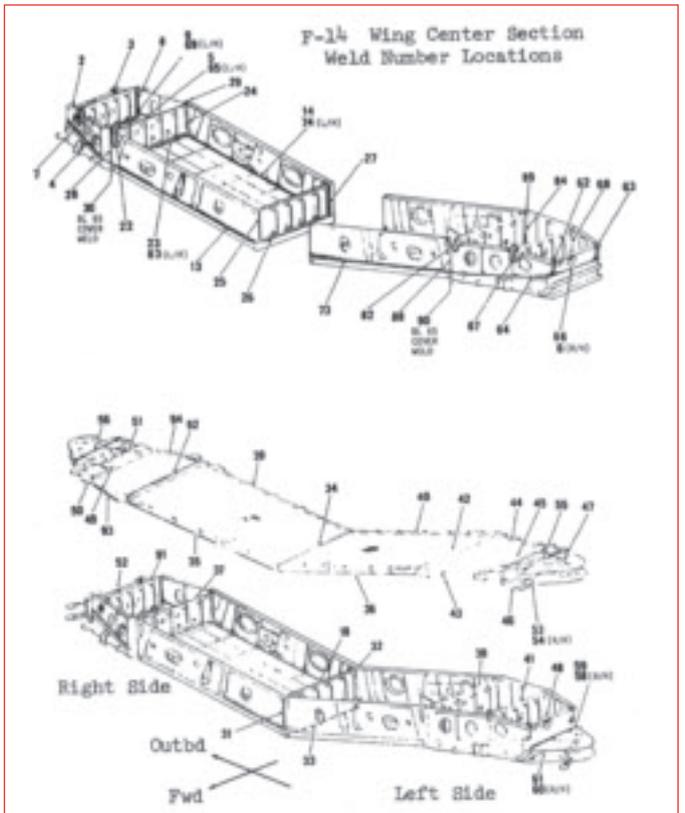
Line drawings of the F-14 wing center section, showing the location of all EB welds by the internally used numbering system at Grumman.
